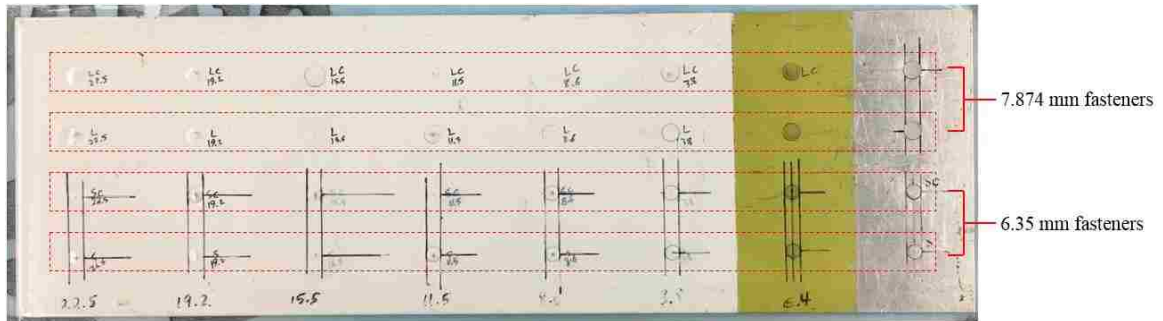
Test panel with cracked & un-cracked fastener heads.
